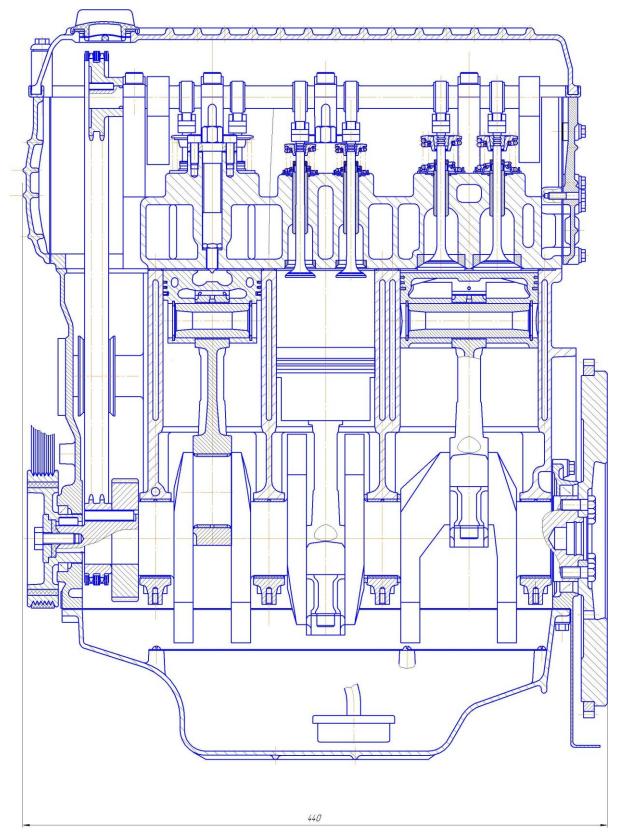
Longitudinal section of the z-engine with piston compressor.
